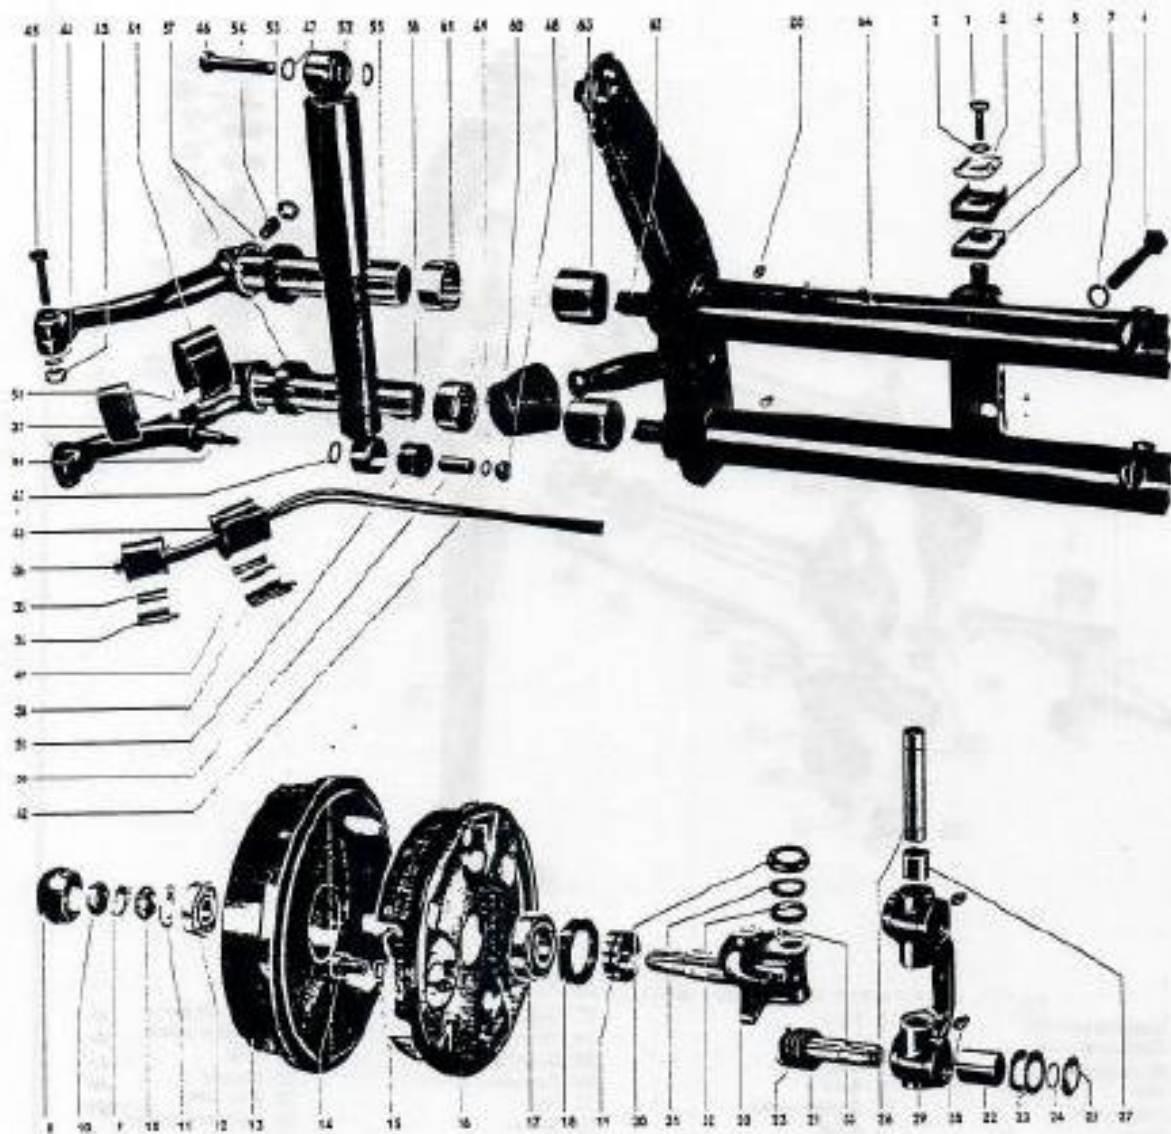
FRONT AXLE ASSEMBLY - LINK PIN TYPE - EXPLODED VIEW
